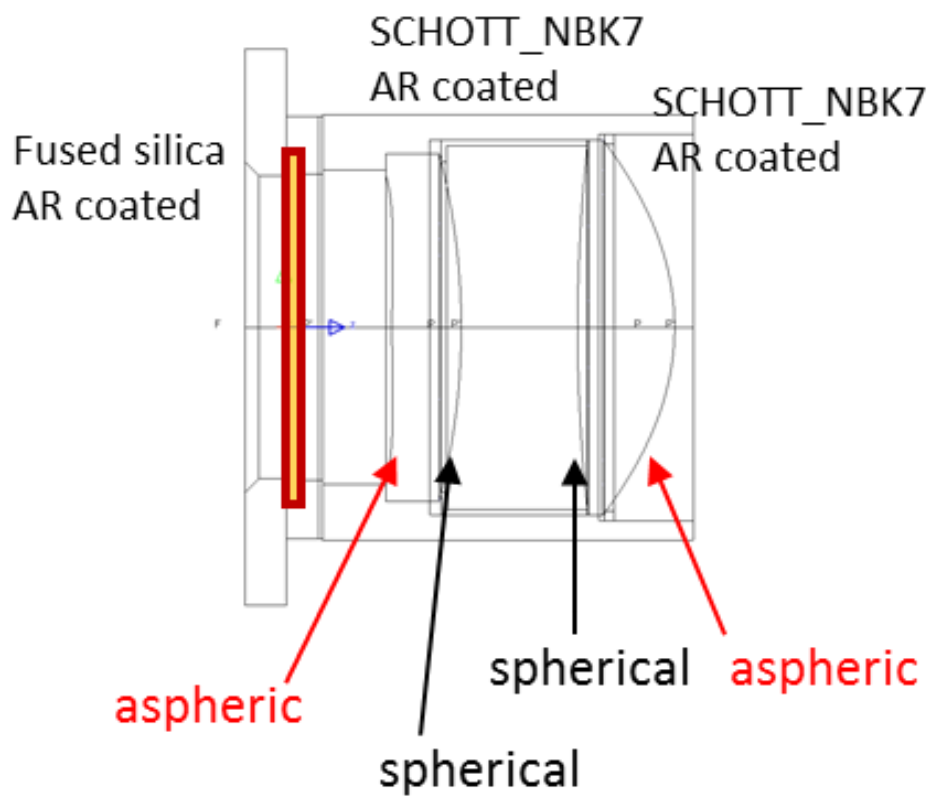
The drawing of assembly of the vacuum window and collecting lens housing.
